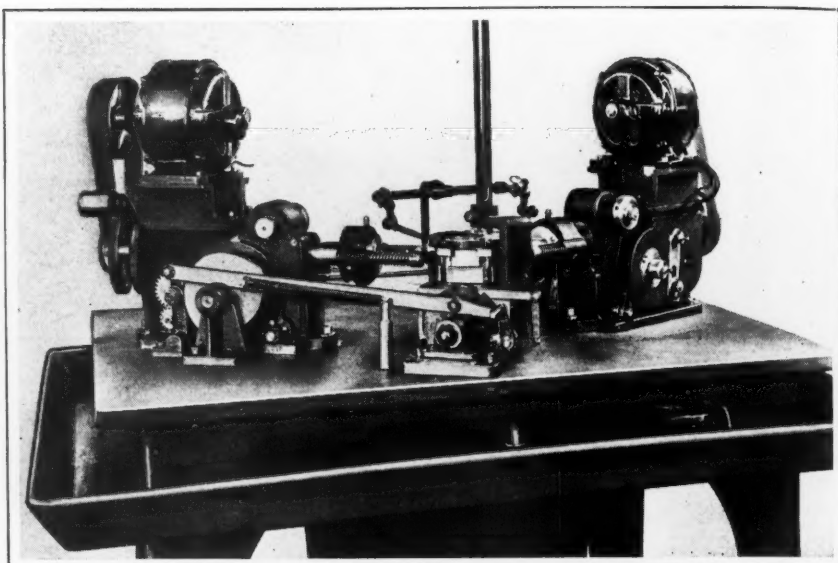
Special Drilling Machine Made up of Two Langelier Drilling Units
